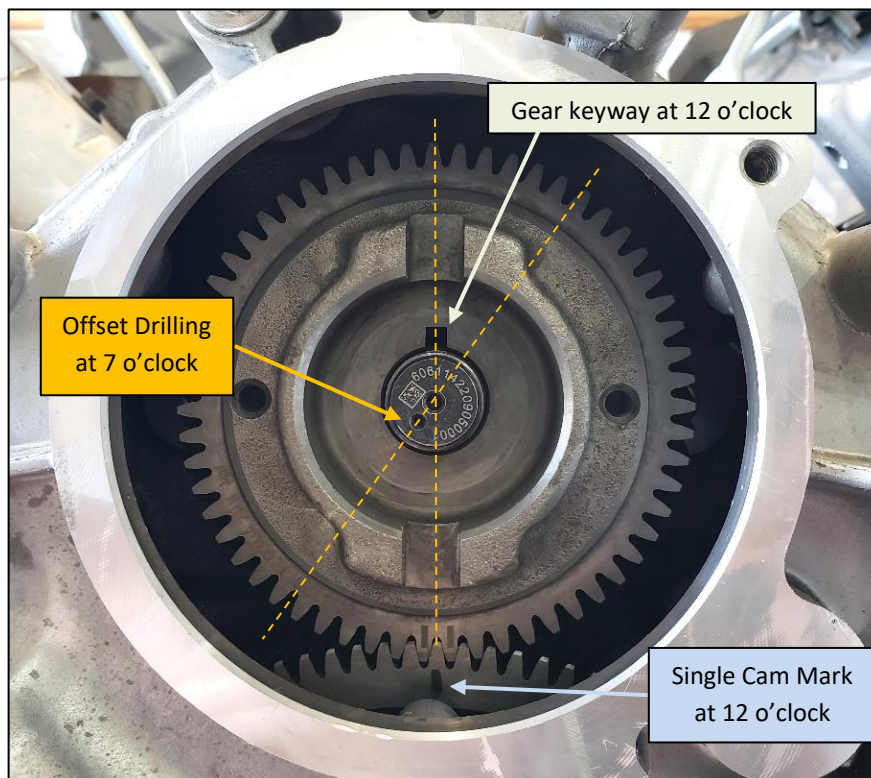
Fuel Pump Timing on Engine – Offset Hole Location
